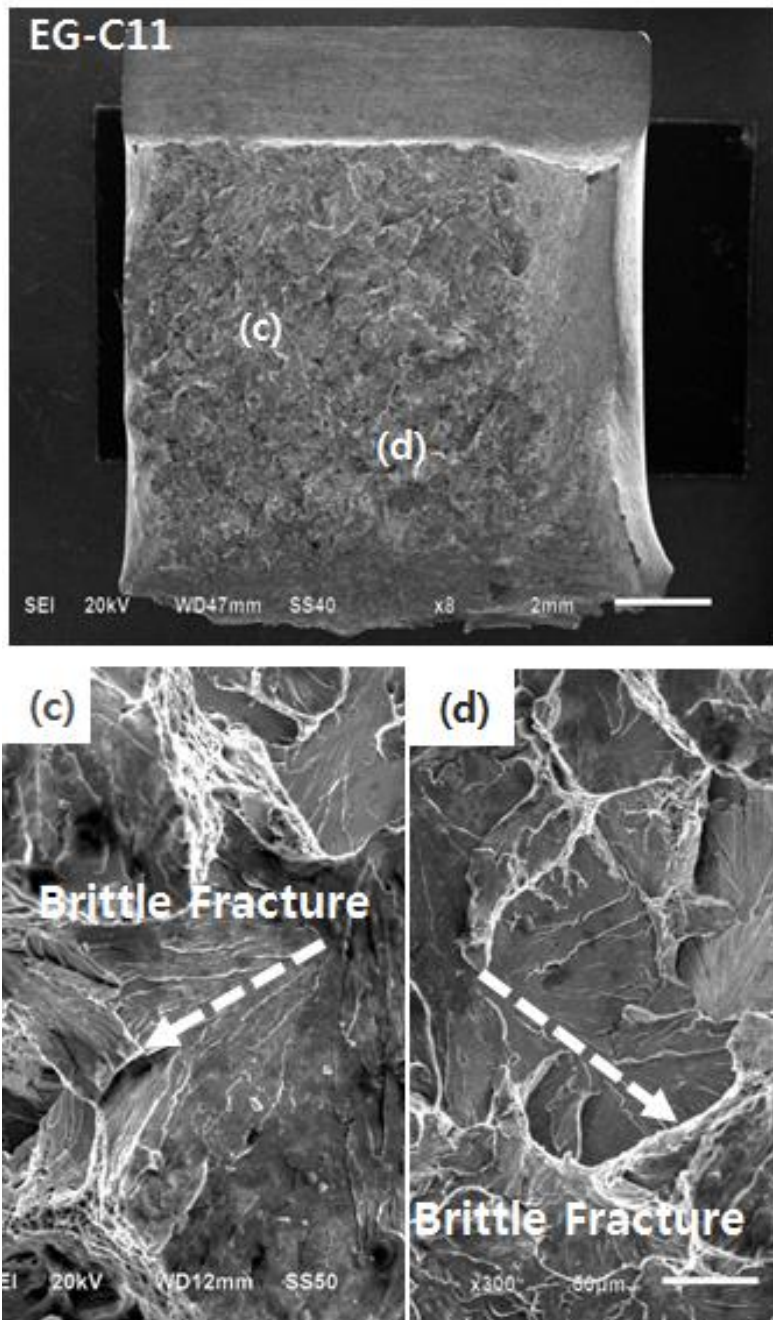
Fractographs of Charpy impact specimens fractured at 0°C for the EG-C11 fusion line specimen
